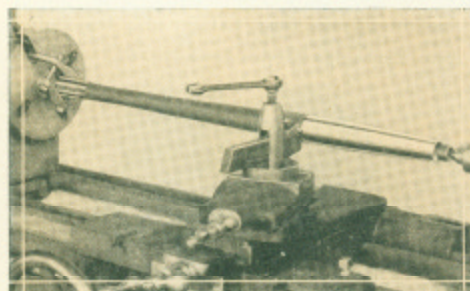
Turning Taper of Automobile Axle, Using Tailstock Set Over to Degree of Taper
